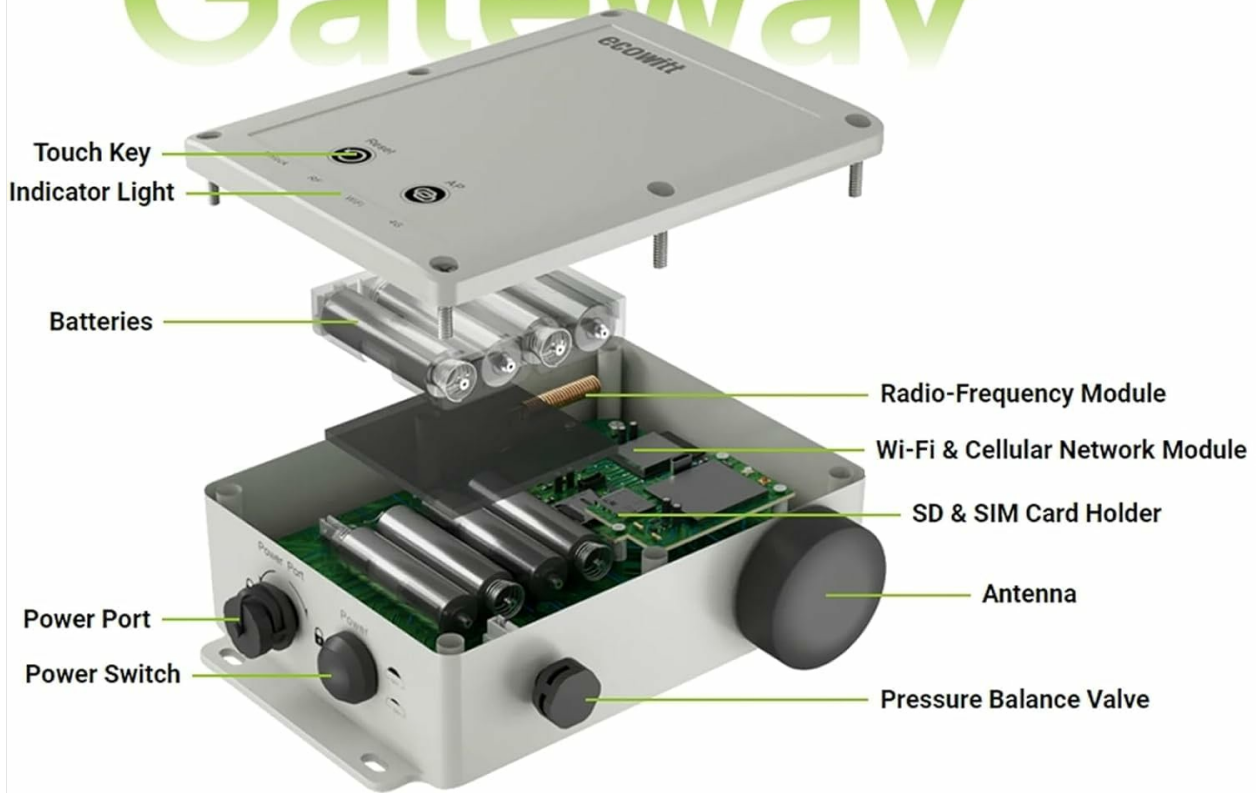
Exploded view of the WS6210 Gateway, highlighting key internal and external components.
